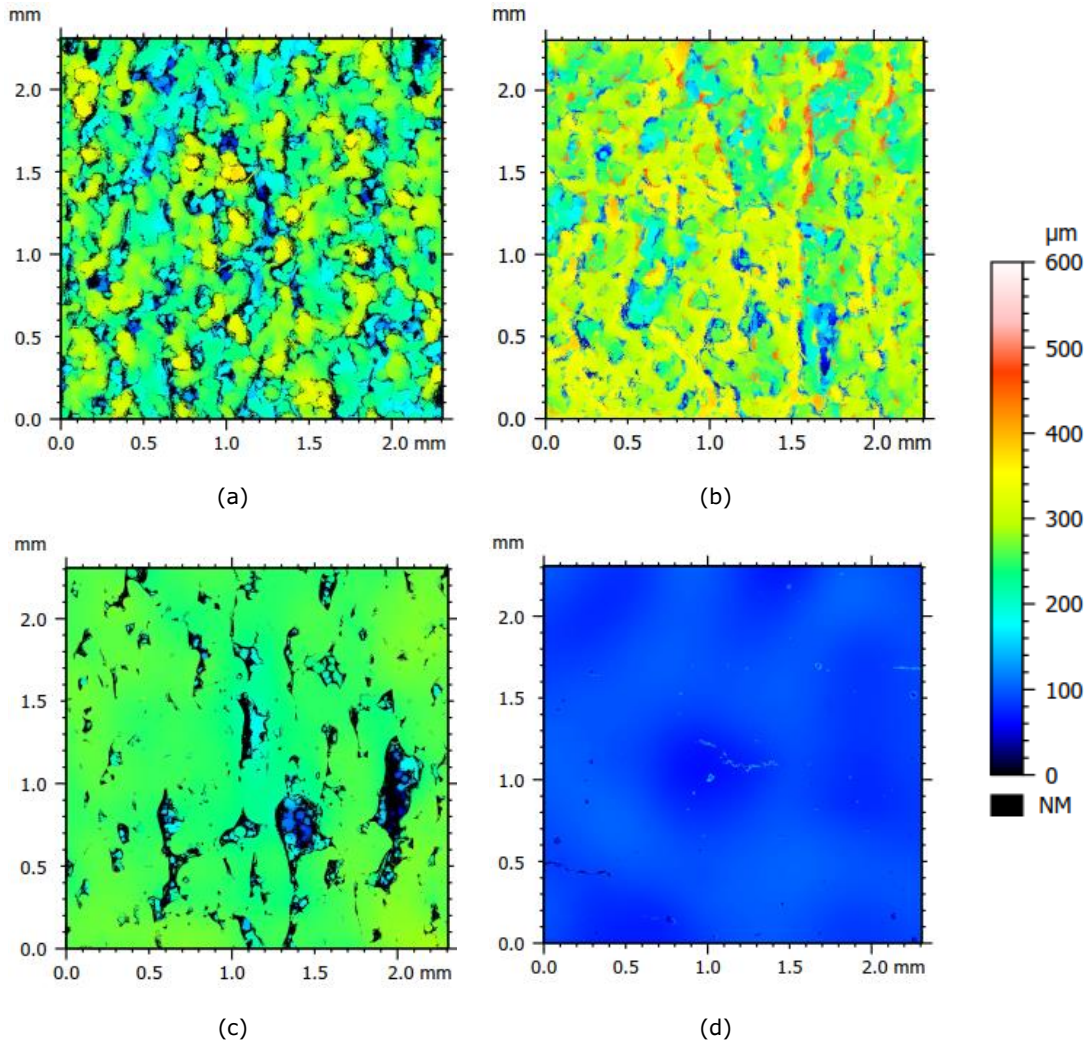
Surface topography of the selected specimens. (a) Specimen 2 in as-built condition, (b) Specimen 6 in as-built condition, (c) Specimen 2 after final bath-PEP step and (d) Specimen 6 after standing-wave-PEP.
